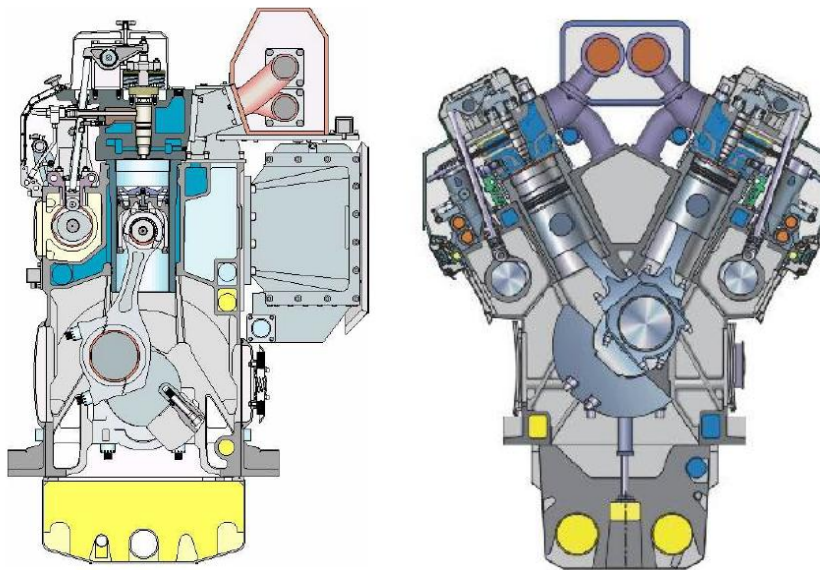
Cross-sections of L and V engine configurations; cooling water channels marked with dark blue /46/
